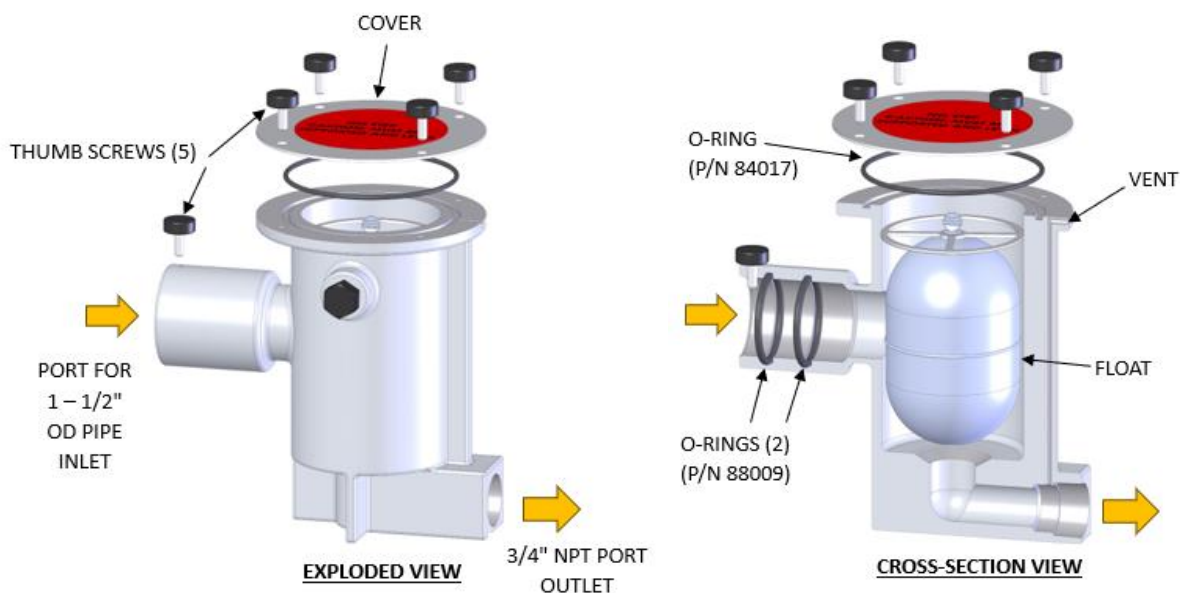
External Condensate Trap – Cross-Section & Exploded View
